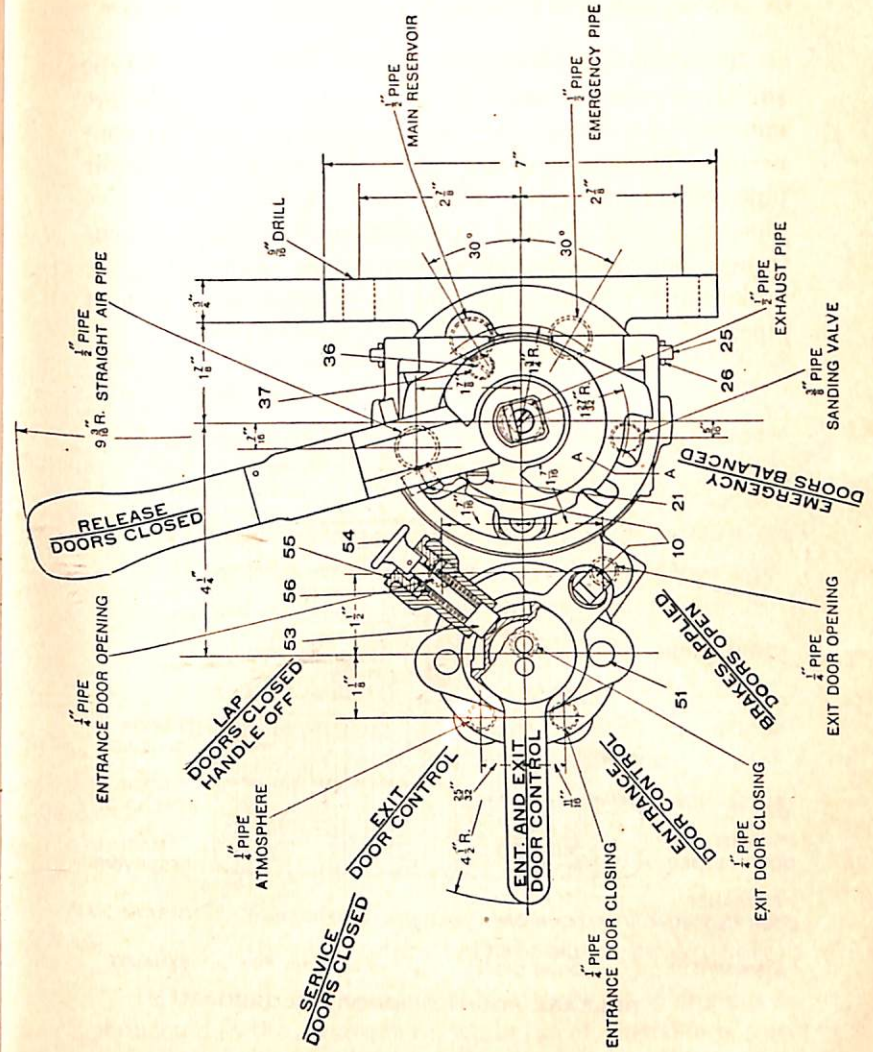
Plan View of the M-28 Brake Valve with Selector Valve
